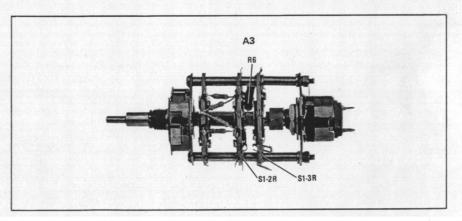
Input Level Switch Assembly A3 Component Locations
